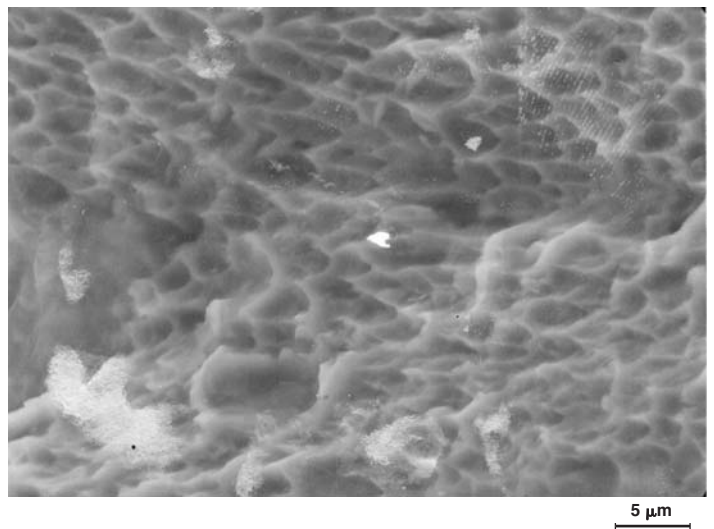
Fracture surface of one of the wires showing dimples characteristic of tensile failure
